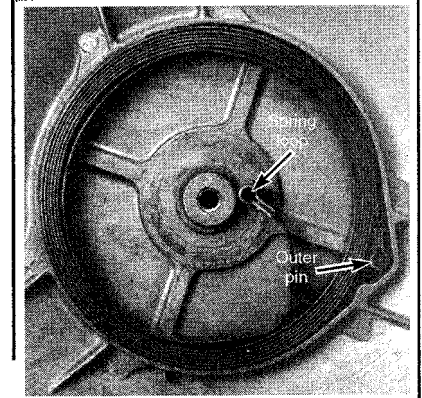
When installed, make sure the spring is coiled clockwise when followed from inner toward outer loop
